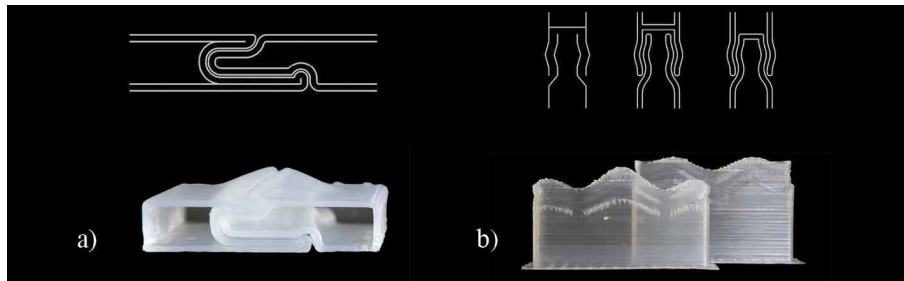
a) Vertical panel edge connection with a tolerance of 1mm. b) Horizontal panel edge connection with a tolerance of 2mm. (Image source: [128])
